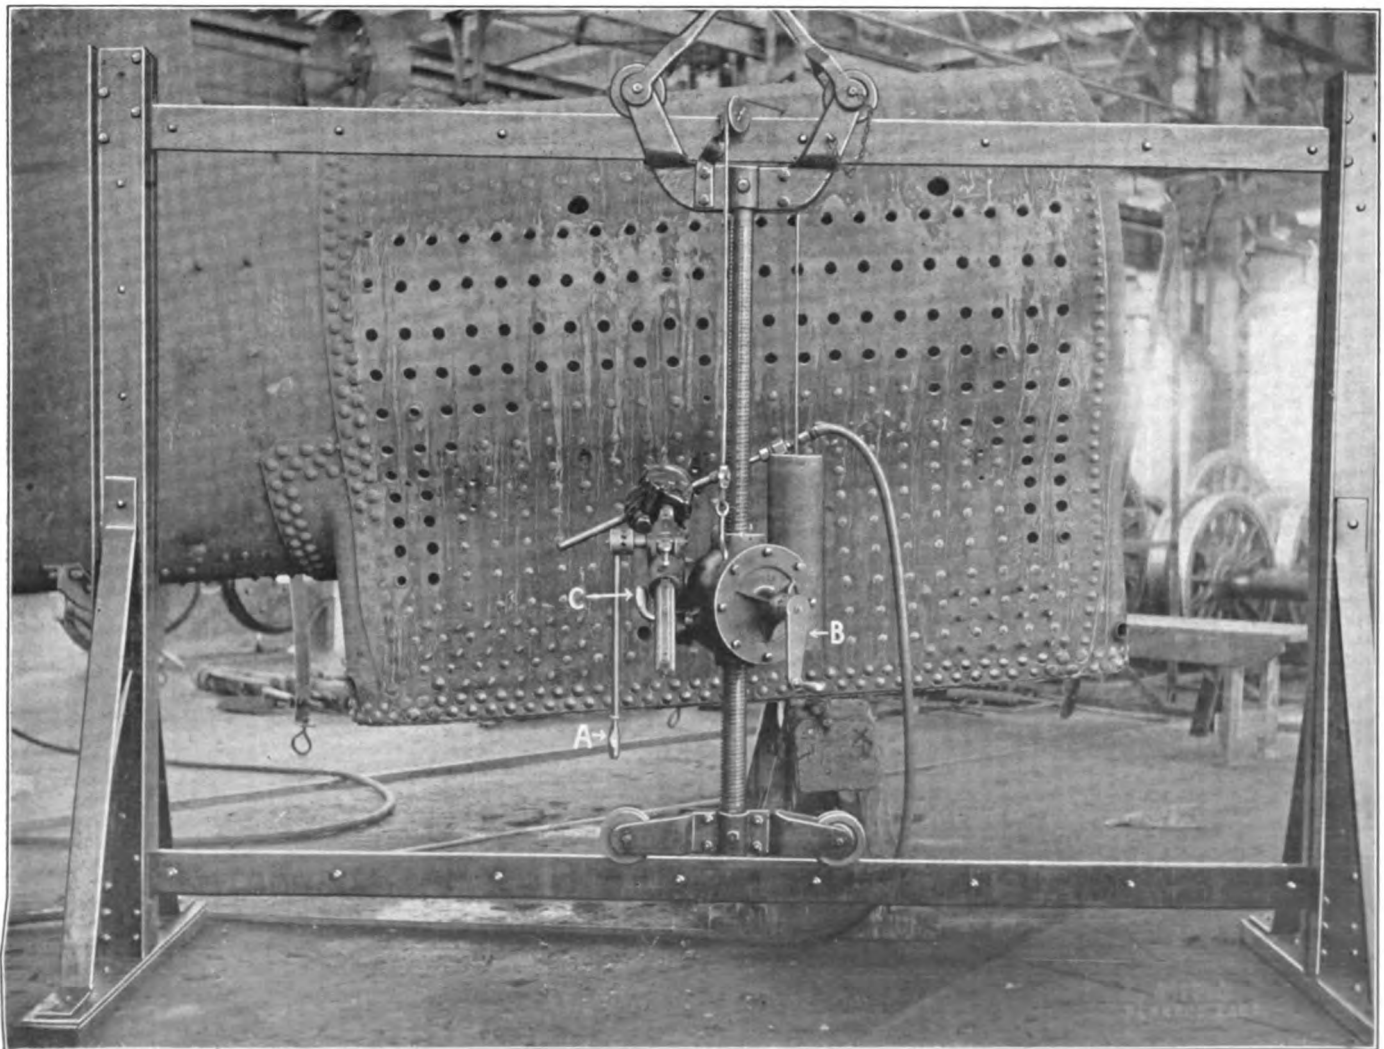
Arrangement of Drilling Apparatus for Use on Boilers.
